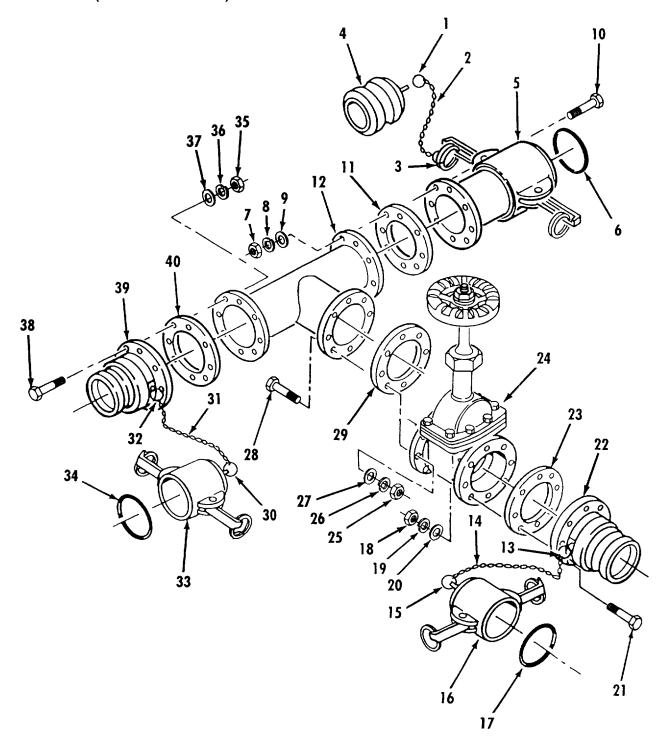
Manifold (4-Inch/One Valve) Repair.
